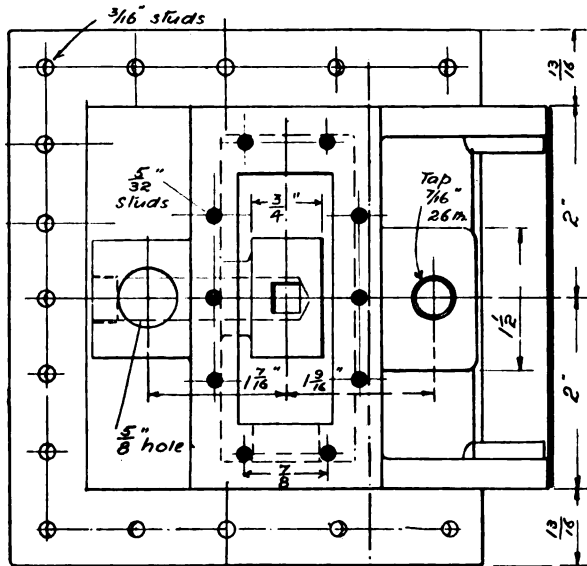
PLAN OF CYLINDER CASTING, COVERS, AND OTHER FITTINGS REMOVED. (Half full size.)
